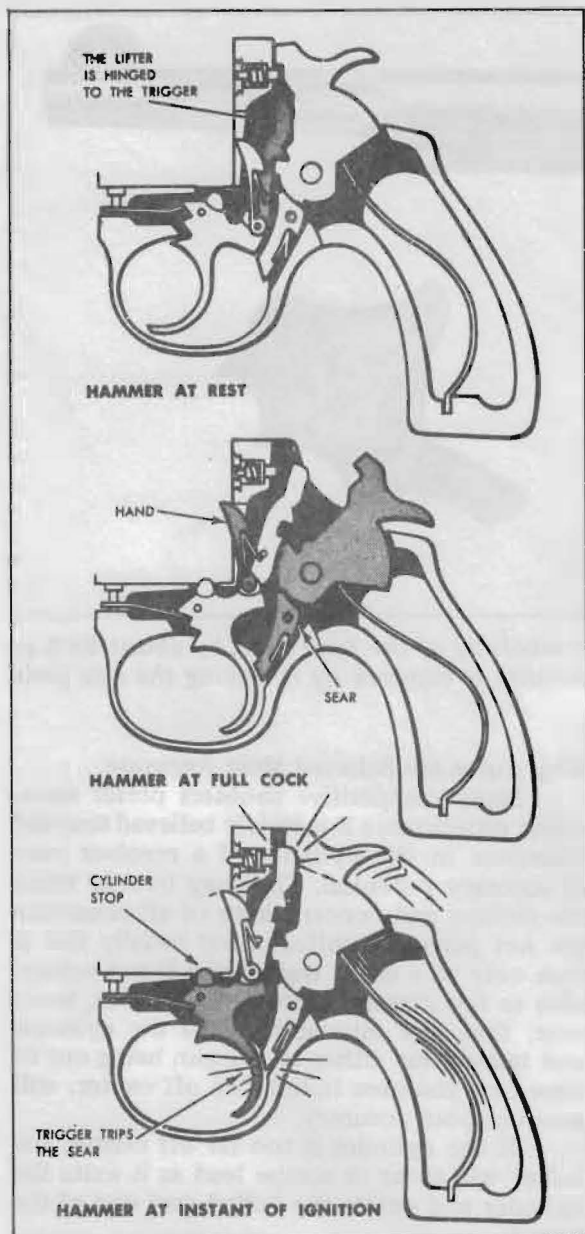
Cross-section drawings illustrate the sequence of moving parts in the hammer assembly of a typical top-break Iver Johnson revolver. (Photo courtesy National Rifle Association)
